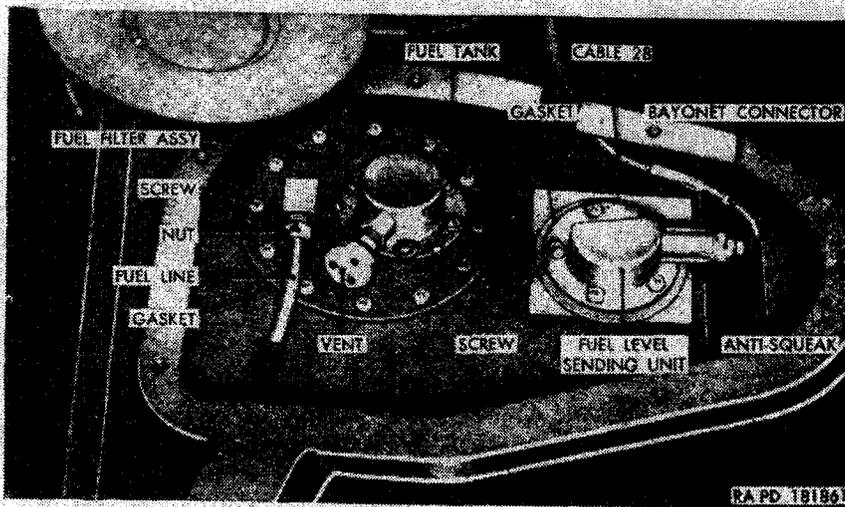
Fuel tank, fuel filter, and fuel level sending unit assemblies (M170)—installed—driver's seat and fuel tank unit access plate removed.
